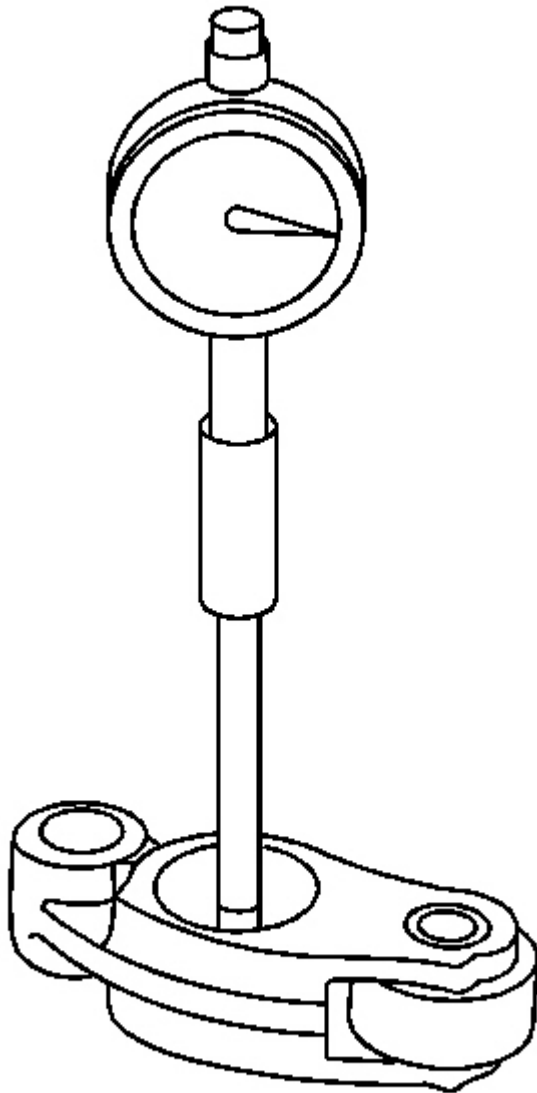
Measuring The Inside Diameter Of The Rocker Arm Bores
